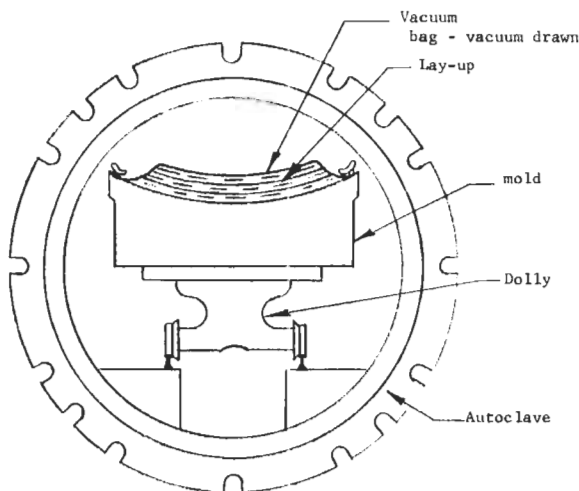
TYPICAL END VIEW OF AUTOCLAVE WITH MOLD AND LAY-UP IN PLACE
